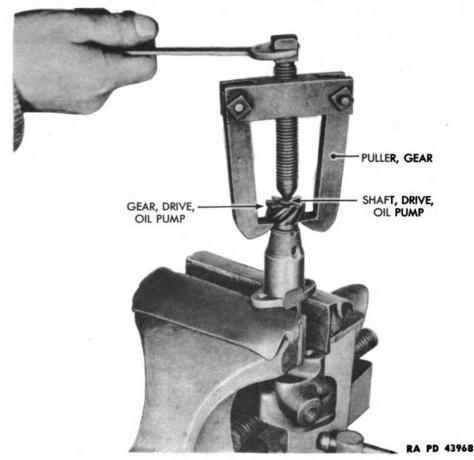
Removing Oil Pump Drive Gear from Oil Pump Drive Shaft
